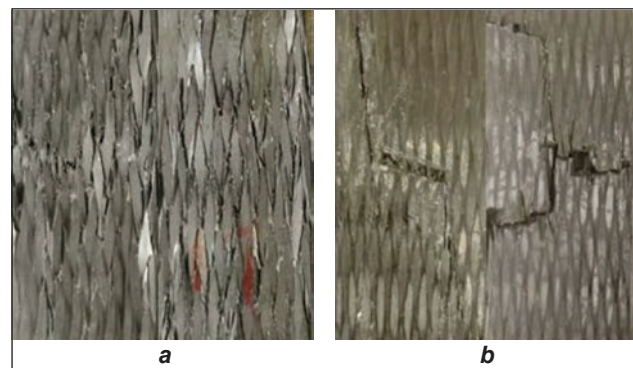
Photographs of un-notched 3D braided specimens after the tensile tests: *a* – Style I; *b* – Style II
